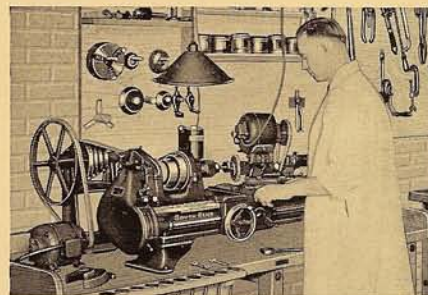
Grinding a Valve Face in Lathe, Using Electric Valve Grinder
